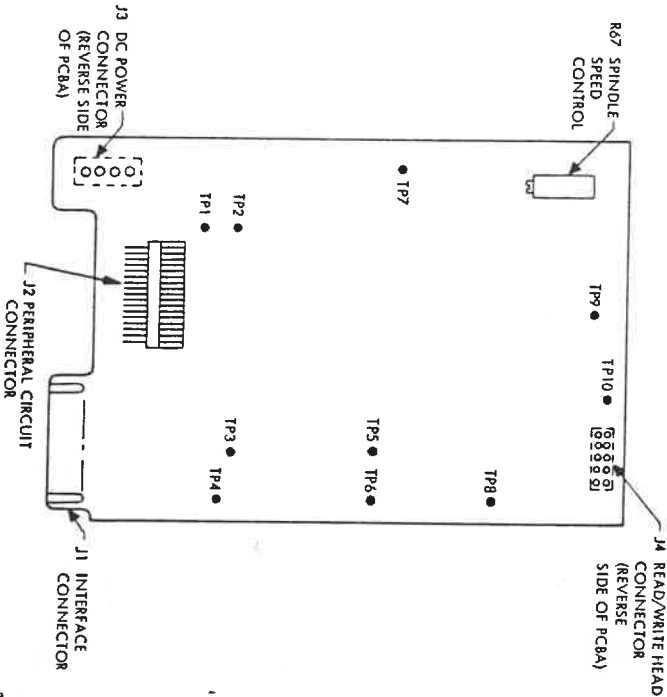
FD250 PCBA No. 600491, Test Point and Connector Placement
